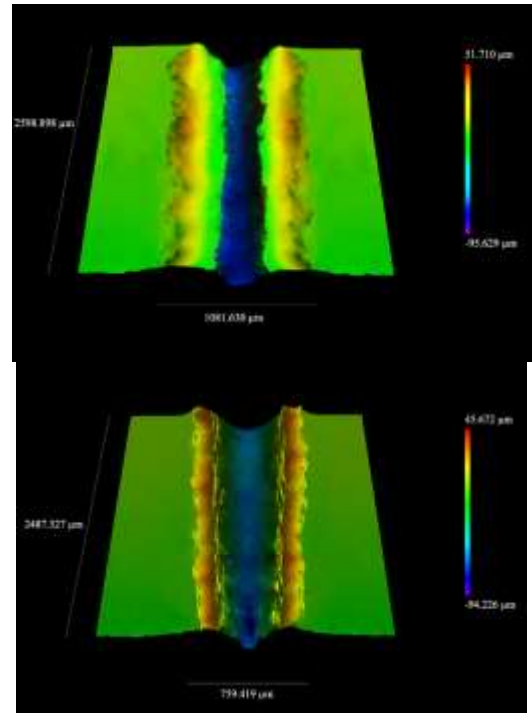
Using a confocal laser scanning microscope with a 20-watt laser & a scan speed of 250, 350, or 500 mm/s, the device's depth is shown.
